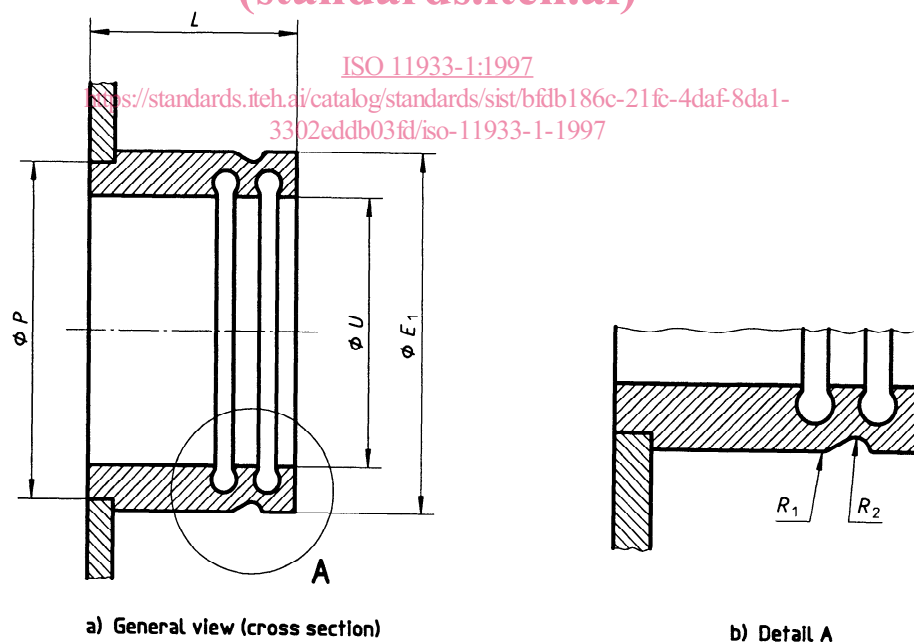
Example and dimensions of welded glove/bag port having two internal and one external groove
